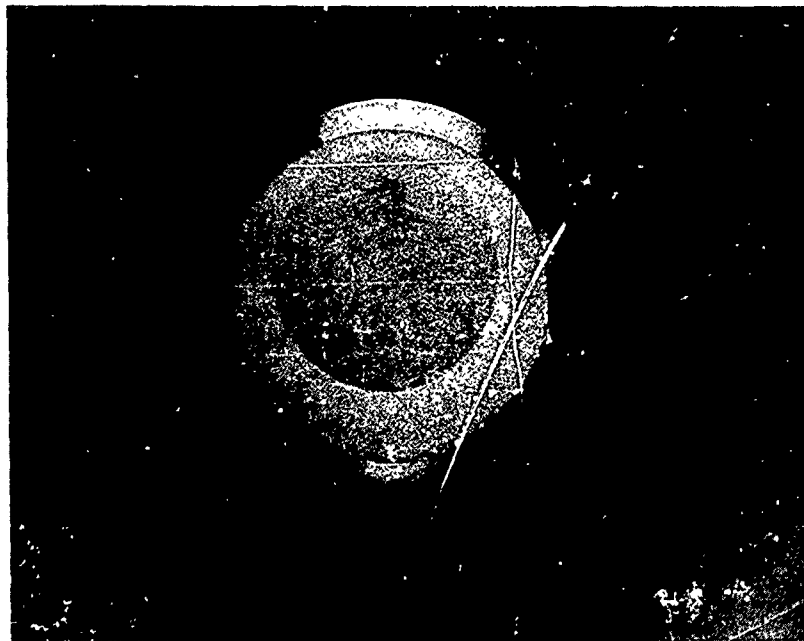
FRACTURE SURFACE OF SAMPLE 6T ROUND FRACTURE TOUGHNESS SPECIMEN
